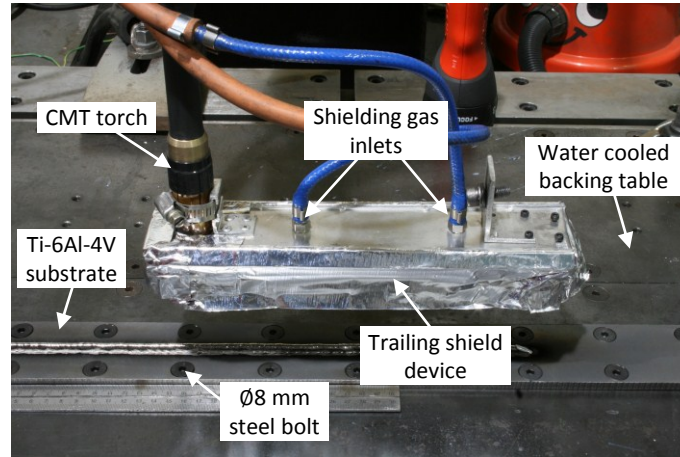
Welding jig apparatus showing the fixing and trailing shield arrangements.
